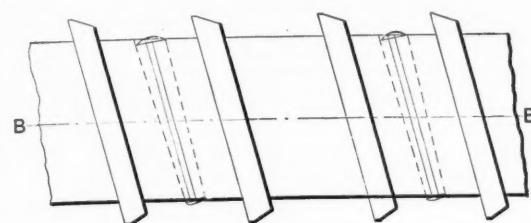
Pratt & Whitney Method of Securing Blades to Body of Axial Cutter.
